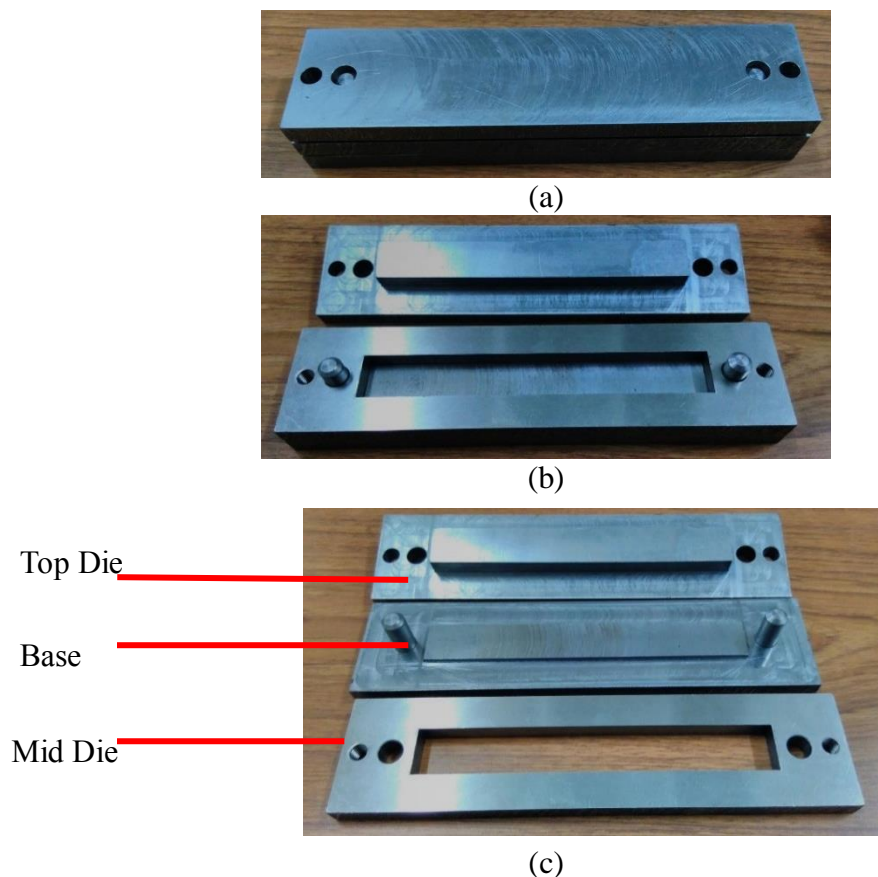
(a) Final assembly of machined die, (b) Assembly of base and middle die and (c) top die, base and middle die in FGM die assembly.
